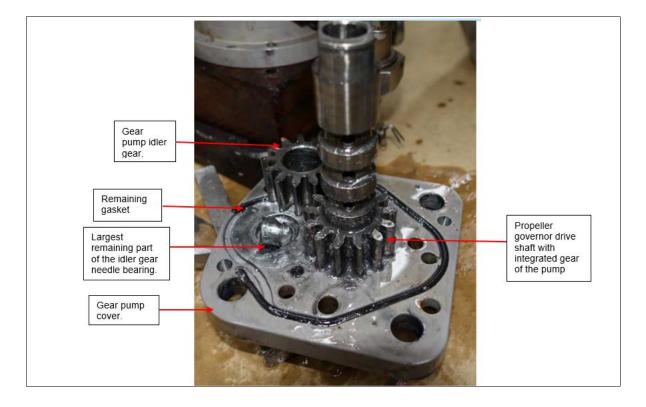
The disassembled propeller governor gear pump. (Source: Engine Manufacturer)
